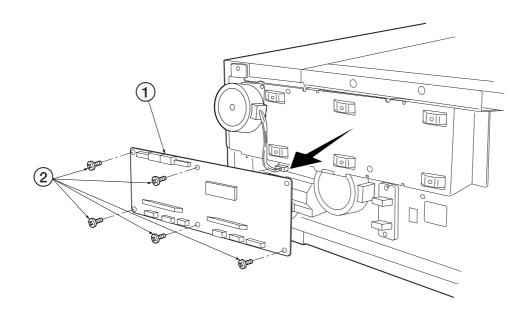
Removing the main board (250-sheet cassette paper feeder)
